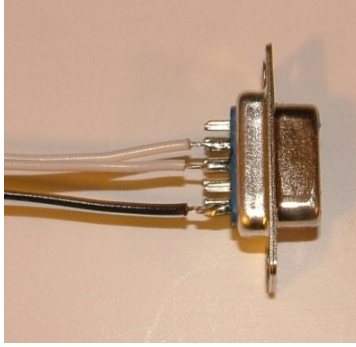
Three wires soldered to the DB-9 connector. Note that the black wire is solder to position #5.
